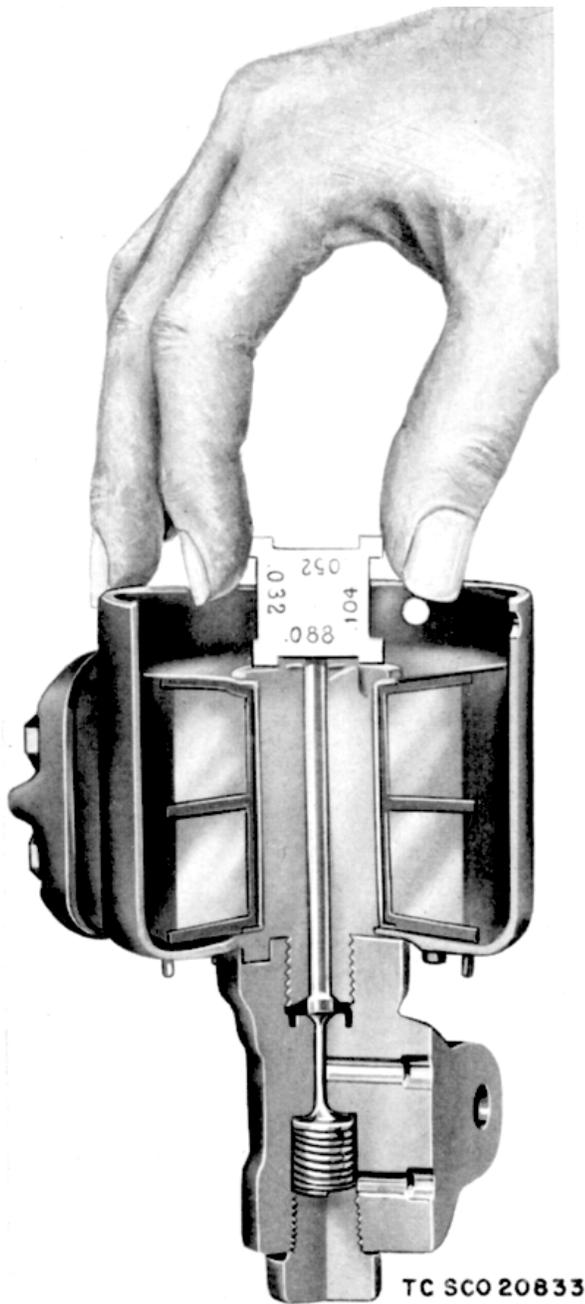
Enclosed coil "On" type magnet valve, gage in proper place for checking valve stem travel.
